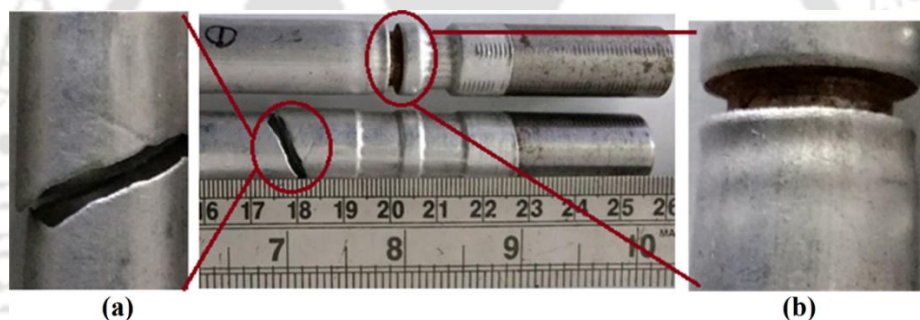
13 Failed sample (a) on Al tube and (b) on groove edge (joining zone)
